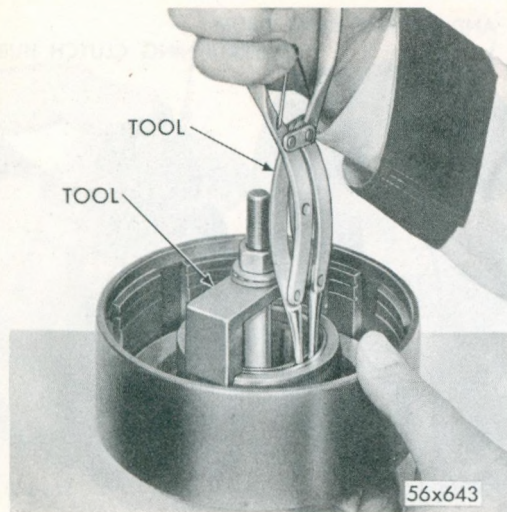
Removal and Installation of Rear Clutch Spring Retainer Snap Ring
